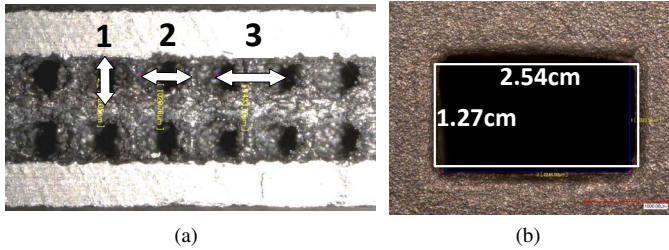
a) Micro-photograph of the interior of the 20-dB directional coupler after destructive testing. Various markers show fabricated dimensions: 1) 1020 μm hole diameter 2) a 818 μm hole diameter and 3) a 1433 μm hole-to-hole spacing. b) Aperture dimension deviation for the Cu waveguide. Inset is the correct WR-10 dimensions, as fabricated: 2.25 x 1.39 cm.
